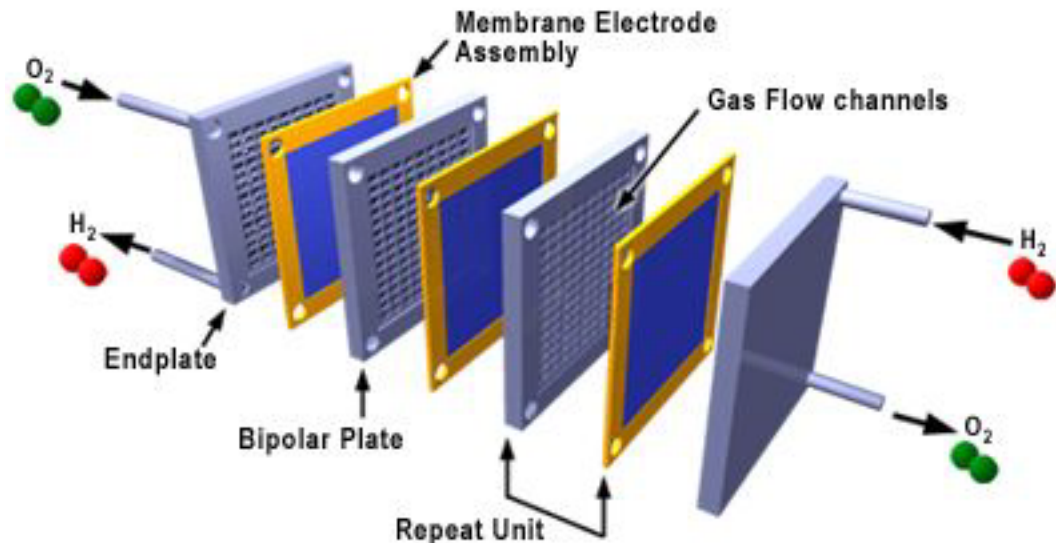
An Exploded View of a PEMFC stack. (Picture: 3M¹)
